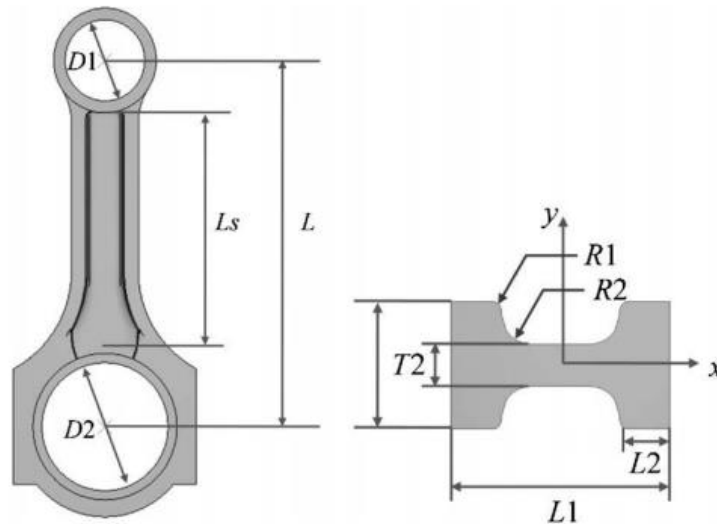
Design parameters and buckling axes of the cross-section in a connecting rod
